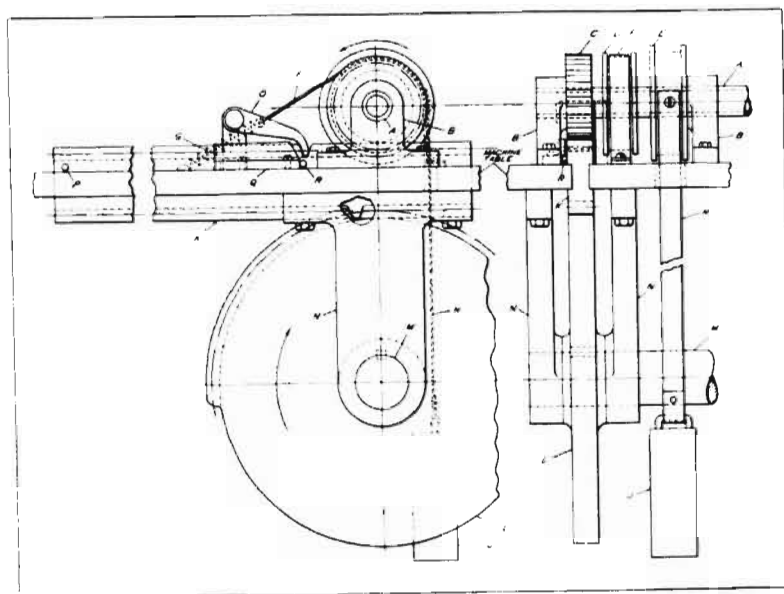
Mechanism that provides intermittent rotary movement from a rotating drive-shaft, and which has provision for automatic reversal upon completion of operating cycle.
